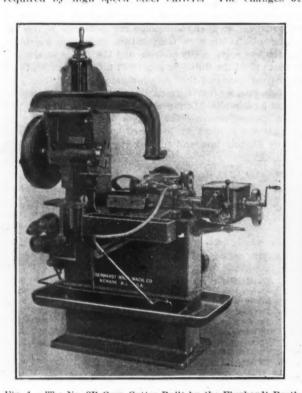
The No. 2B Gear Cutter Built by the Eberhardt Brothers Machine Company, Newark, N. J.
